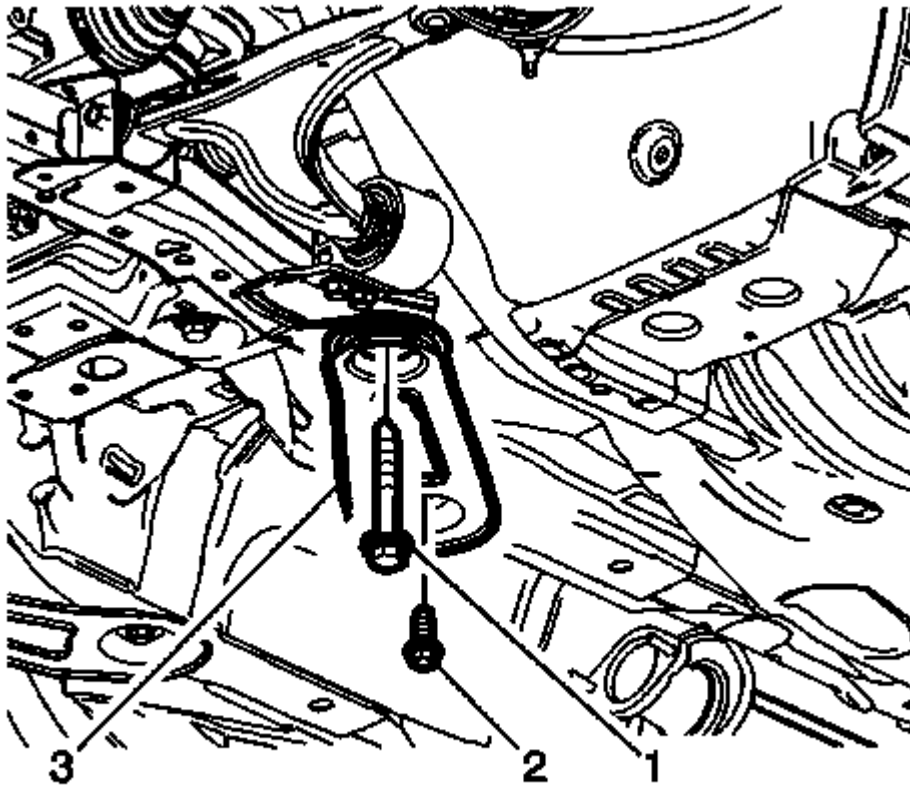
Front Suspension Frame Rear Bolts, Reinforcements & Bolts
